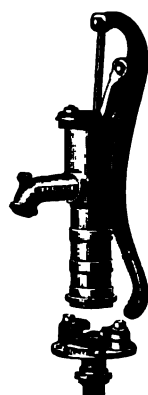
has base screwed to cylinder as shown in cut, and is fitted with coupling and brass thread tube for iron pipe unless otherwise ordered.
